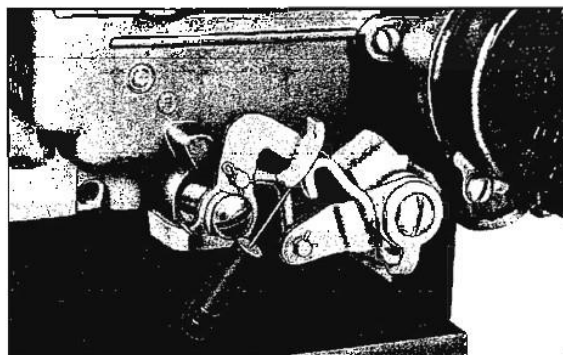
B-99 Checking Secondary Throttle Lever Adjustment
